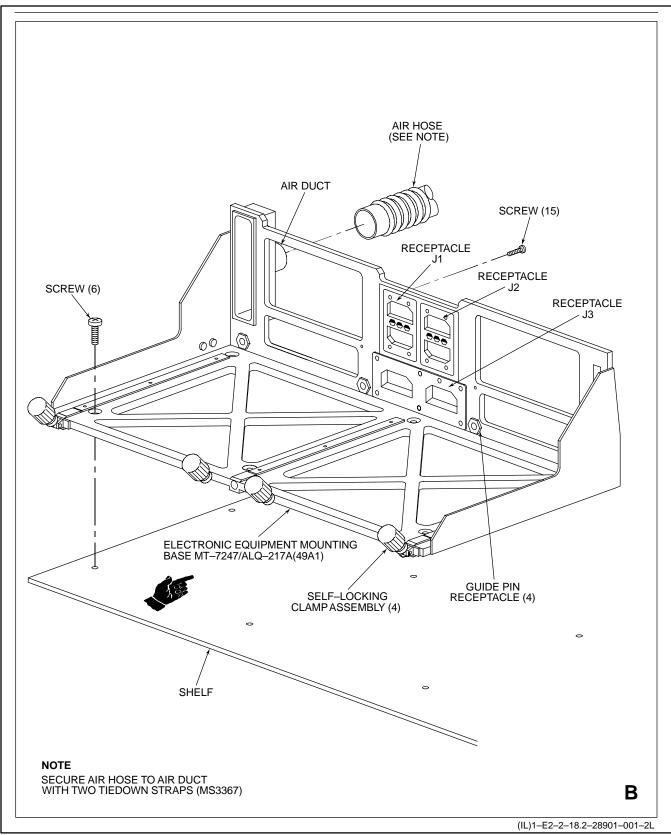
Removal and Installation of Receiver/Processor CP-2471A/ALQ-217 (49A1A1) and Electronic Equipment Mounting Base MT-7247/ALQ-217A (49A1) (Sheet 2)
